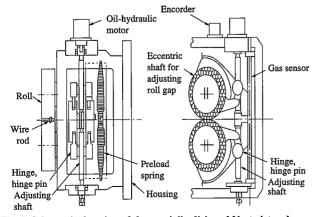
Schematic drawing of the specially disigned No-twist rod finishing mill housing for AGC
